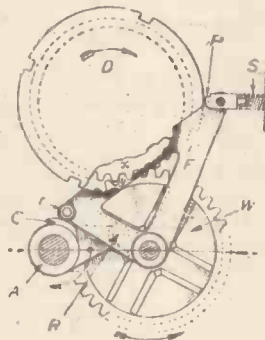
Indexing and locking mechanism for spindle carrier of Acme-Gridley auto-bar machine.
